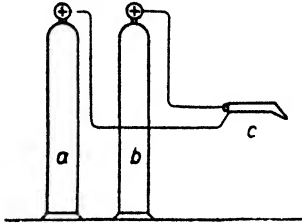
Lay-out of a welding plant using gas from cylinders
